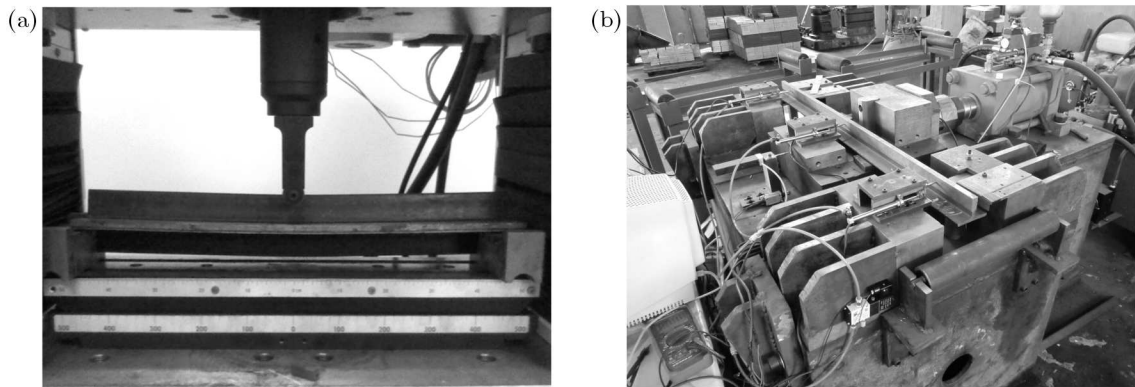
Experimental set-up: (a) on the universal testing machine ($2l = 500$ mm), (b) on the self-made hydraulic straightening machine ($2l = 1000$ mm)
